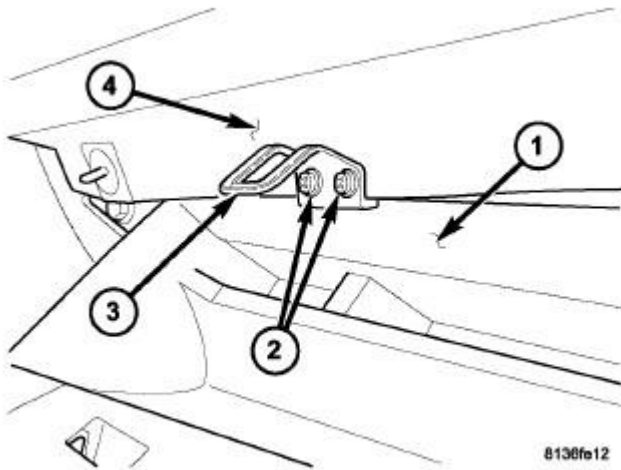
Removing/Installing Striker-Latch-Glove Box
